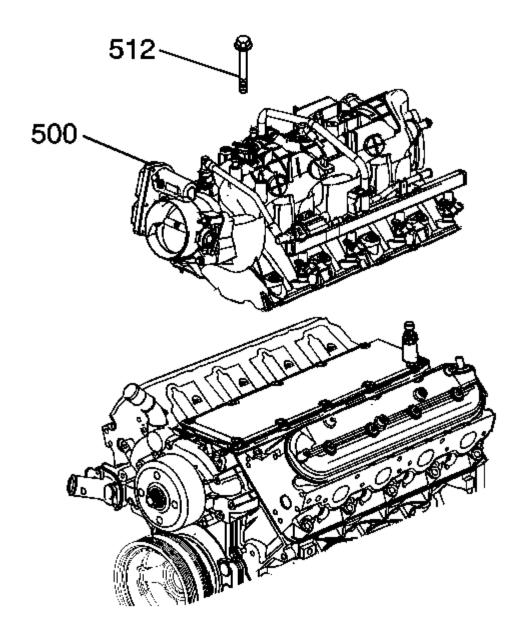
View Of Intake Manifold Bolts Courtesy of GENERAL MOTORS CORP.
